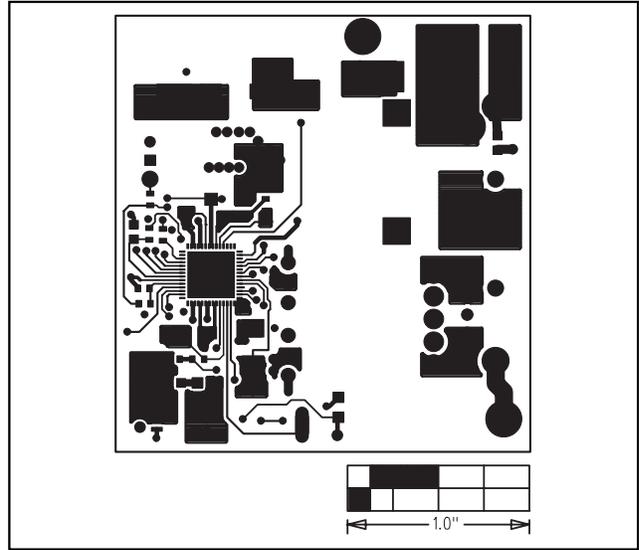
MAX5042 EV Kit PC Board Layout—Component Side
